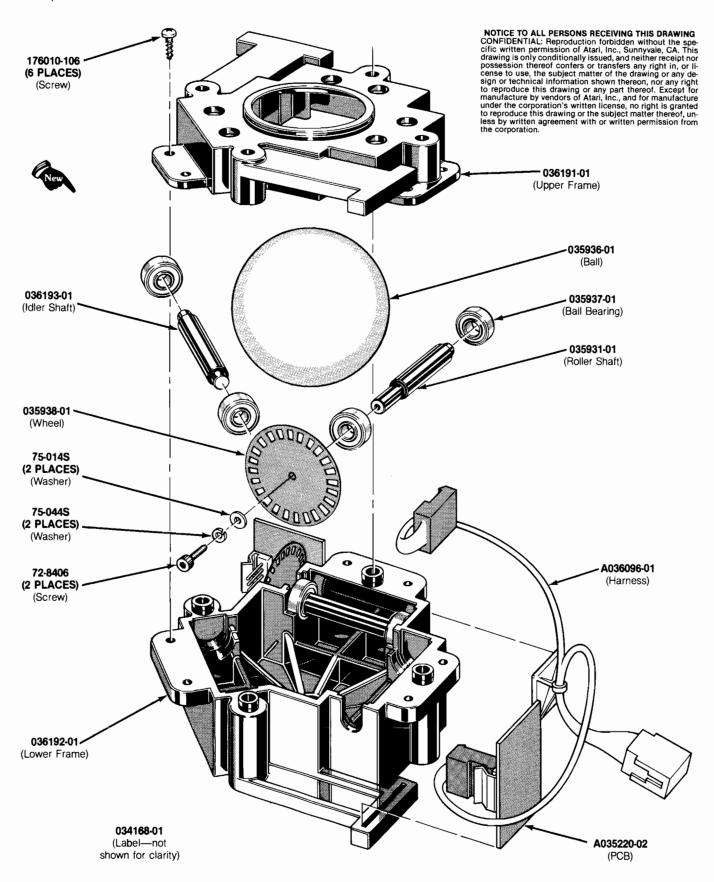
Mini-Trak Ball[™] Assembly A036190-01 A
